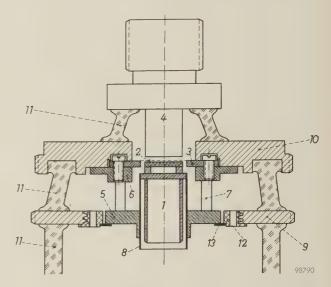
Construction of the 5 cm triode. The darkly shaded section is pre-assembled. I cathode. 2 grid. 3 grid frame. 4 anode. 5 cathode ring (molybdenum) with welding collar (nickel). 6 grid ring (molybdenum). 7 sapphire rods joining the rings 5 and 6. 8 tantalum foil cylinder of cathode, welded to the nickel collar of cathode ring. 9 cathode disc. 10 grid disc. 11 glass envelope rings. 12 closing ring with pump holes. 13 contact foil.
